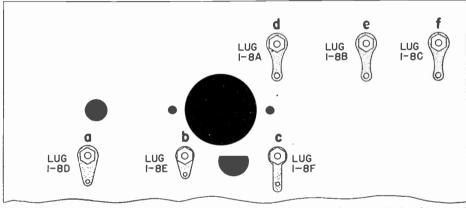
Upon completion of Experiment 5, you should have the six soldering lugs, all tinned, mounted on the chassis exactly as shown here, with the ends of the lugs bent upward as shown in Fig. 20.
